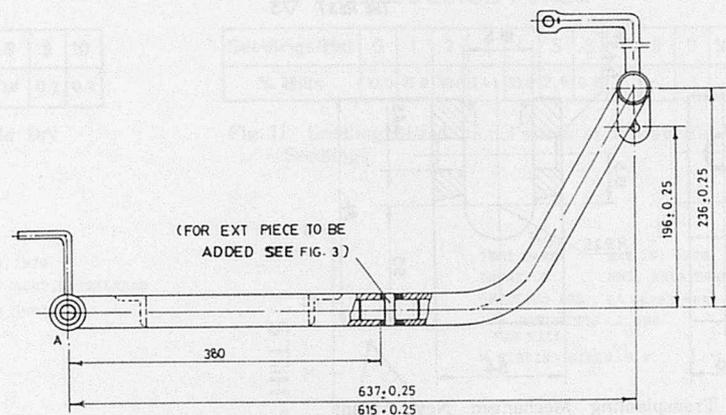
Modified Transplanting Mechanism Mounting Frame
